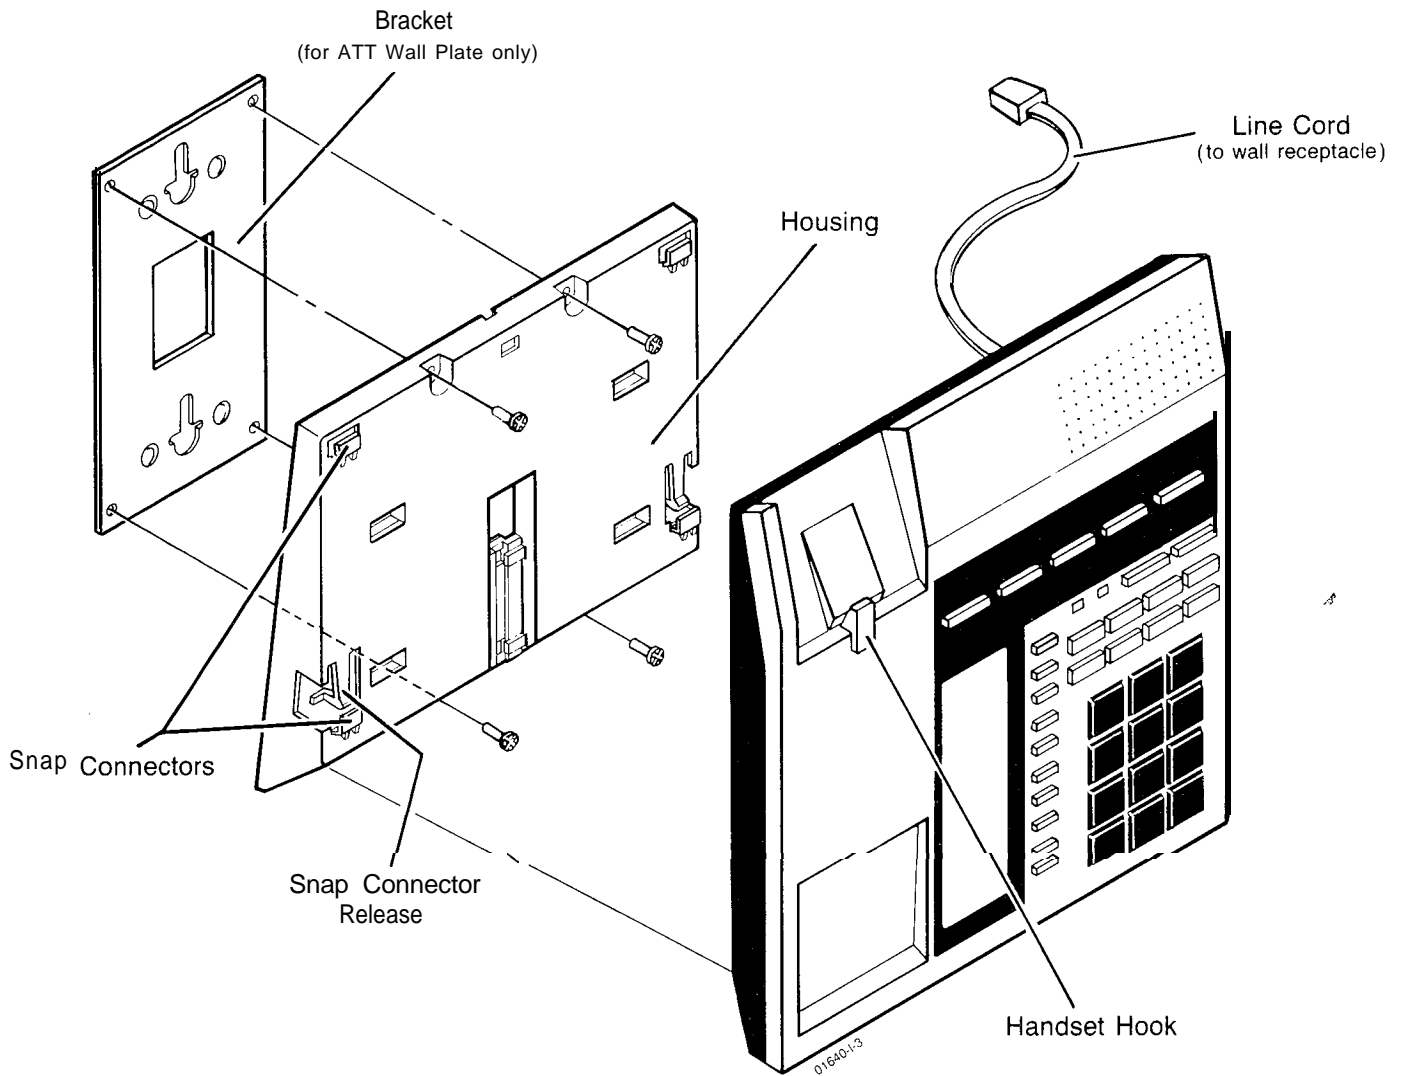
WALL-MOUNTING INSTALLATION
